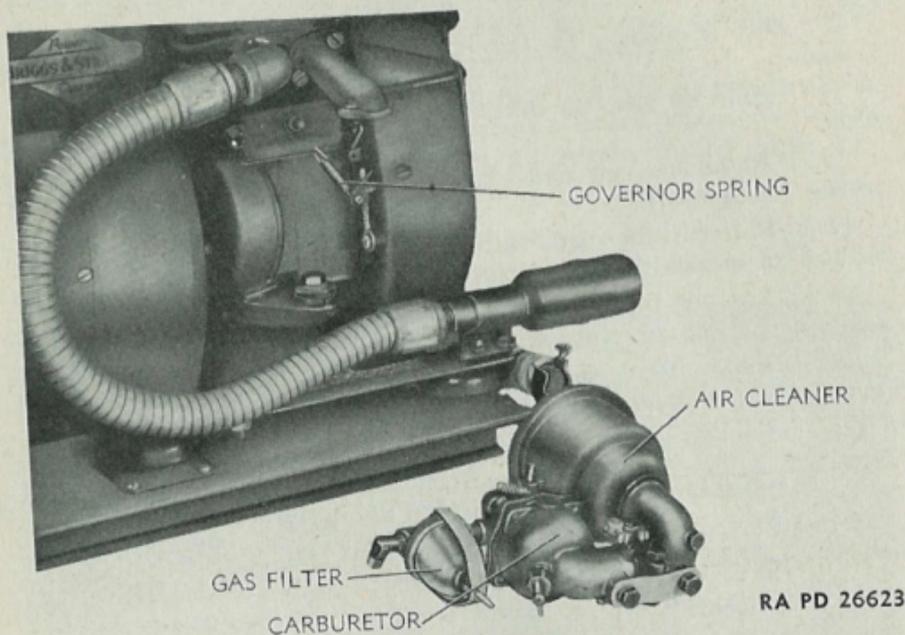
Power Charger—Governor Spring (Gas Filter, Carburetor, and Air Cleaner Removed)
